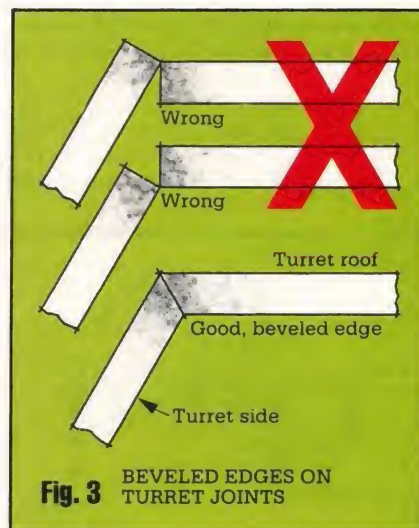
BEVELED EDGES ON TURRET JOINTS
